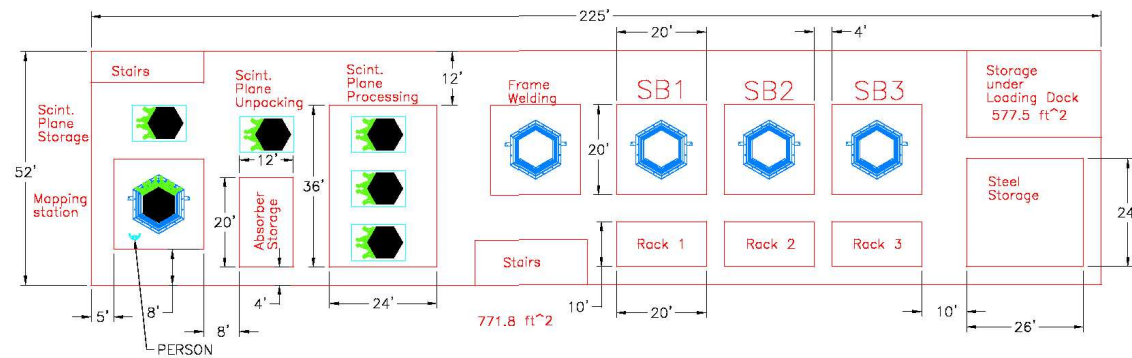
This engineering drawing shows an initial concept of the Wideband Hall layout. Most frame assembly and module assembly activities take place on the strongbacks, labeled “SB1”, “SB2”, and “SB3” in the drawing. Areas for scintillator preparation and module mapping to the left in the drawing. Drawing courtesy of R. Flight.
